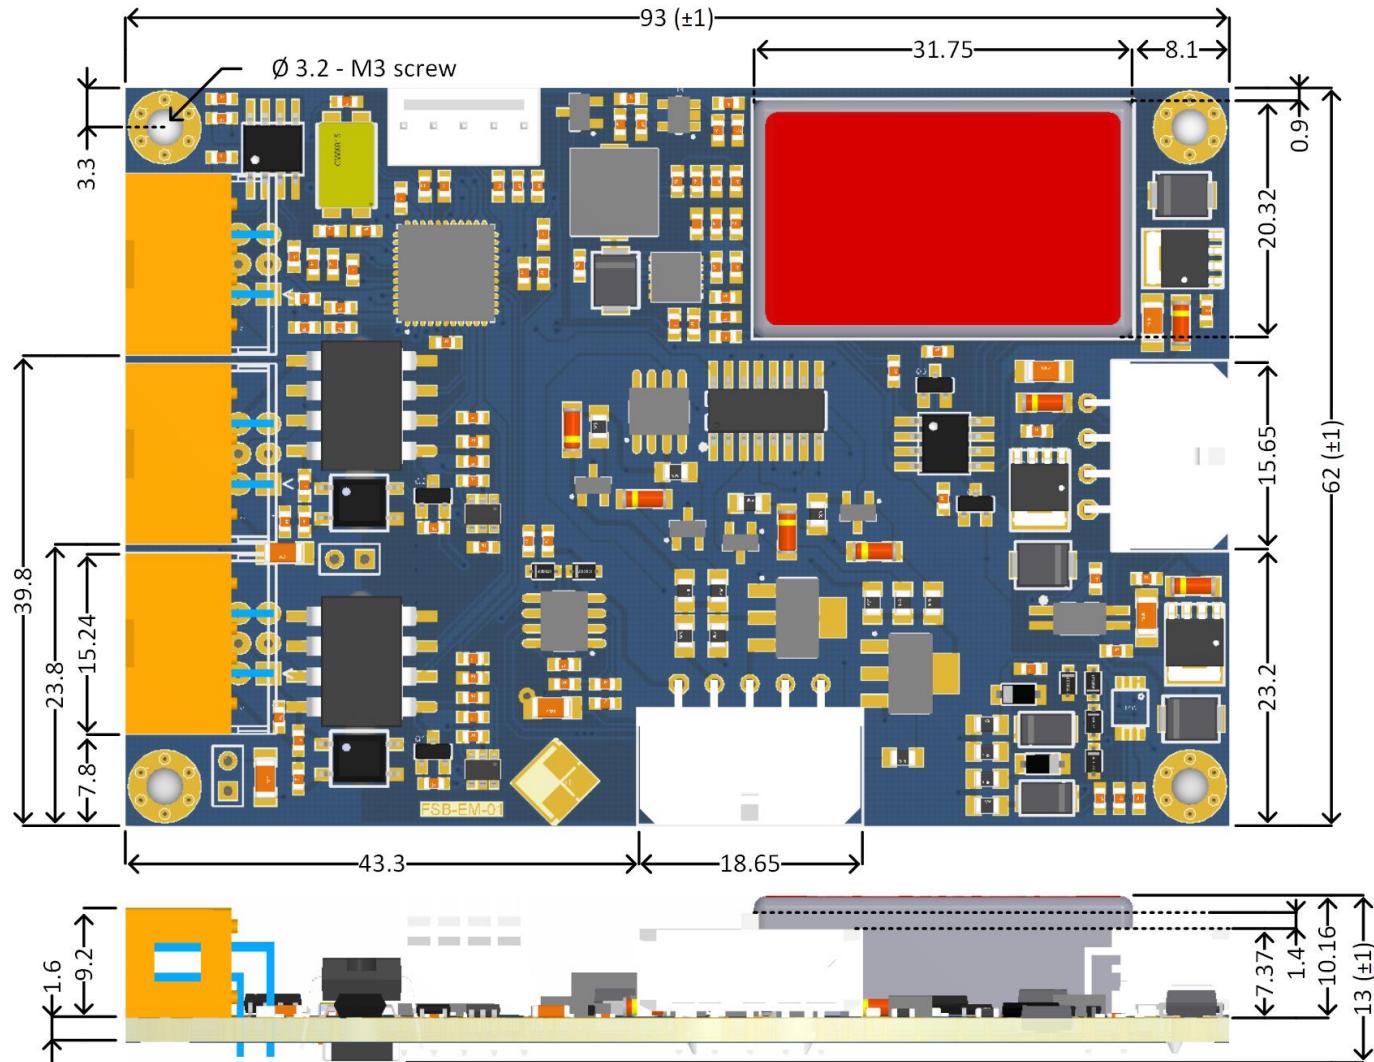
Mechanical views (top and side views) of FSB-PR. Wire-to-board connector version.
